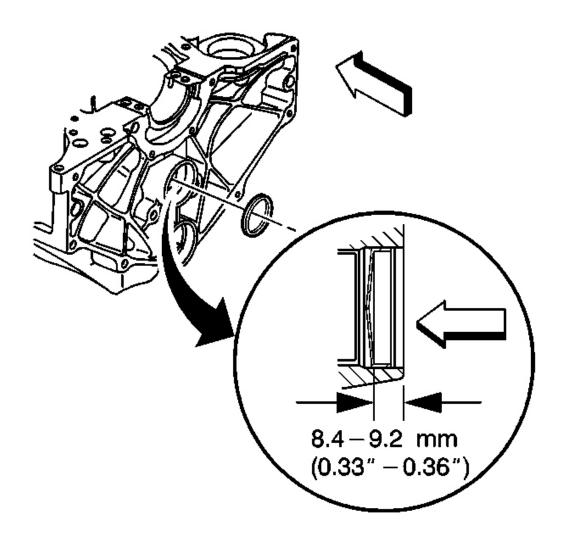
Installing Expansion Cup Plug Into Camshaft Rear Bearing Hole Courtesy of GENERAL MOTORS CORP.
